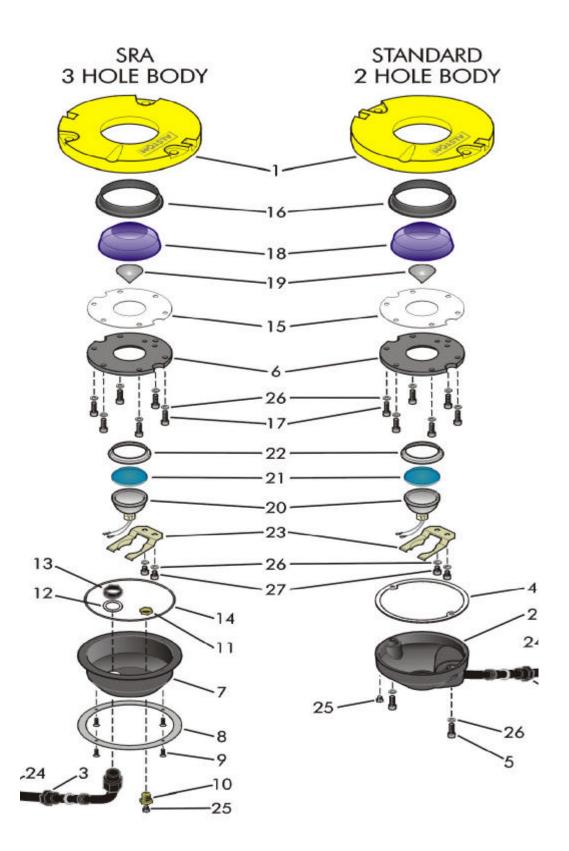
Exploded view of 2 & 3 hole styles of ZA290 series fittings.
